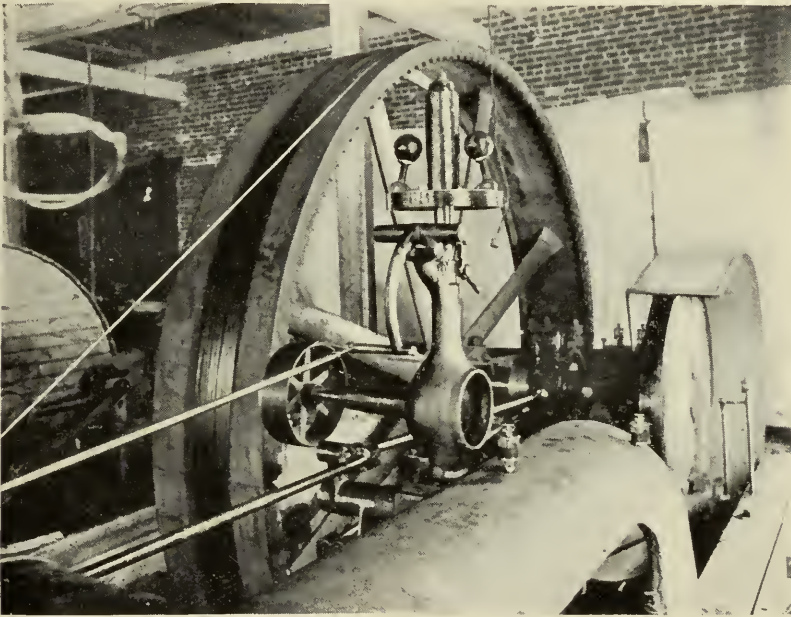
Welded spoke of flywheel, Montville, Conn.
